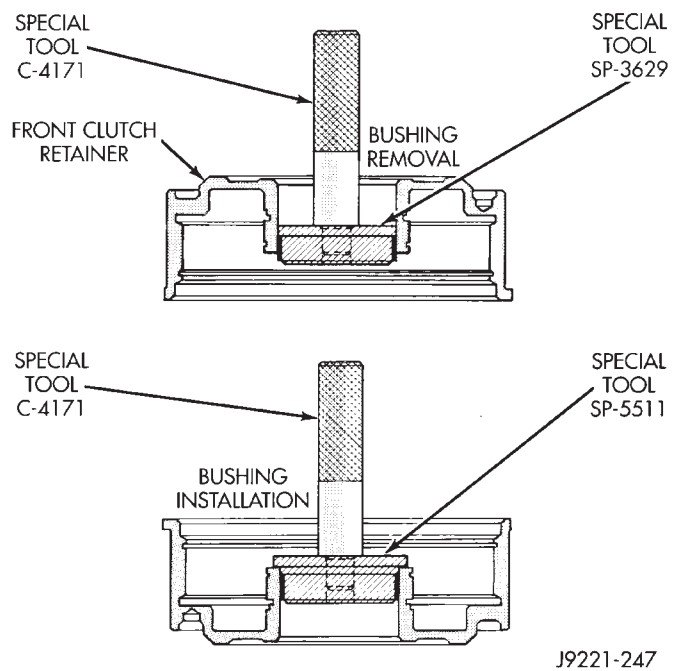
Front Clutch Retainer Bushing Replacement—46RH
